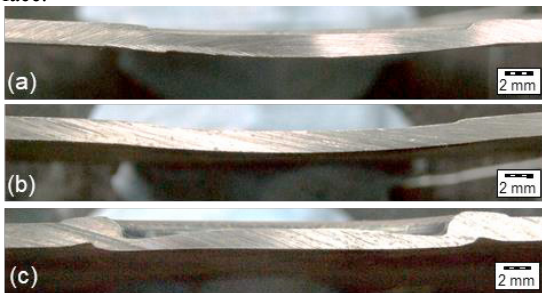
Micrographs of the thinned specimen using (a) convex tool surfaces (initial hardness); (b) without convex die-side (54 HRC); (c) convex tool surfaces with maximum hardness.
